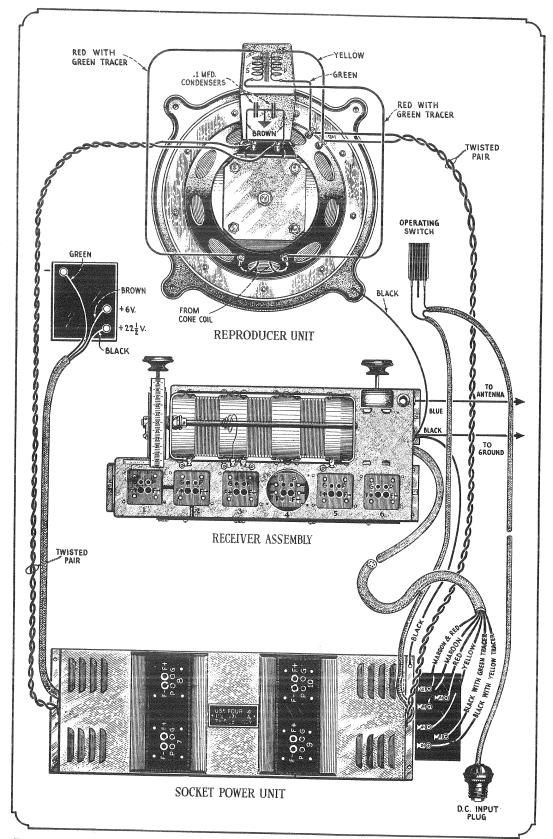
Complete layout and connections of reproducer, receiver and socket power unit
